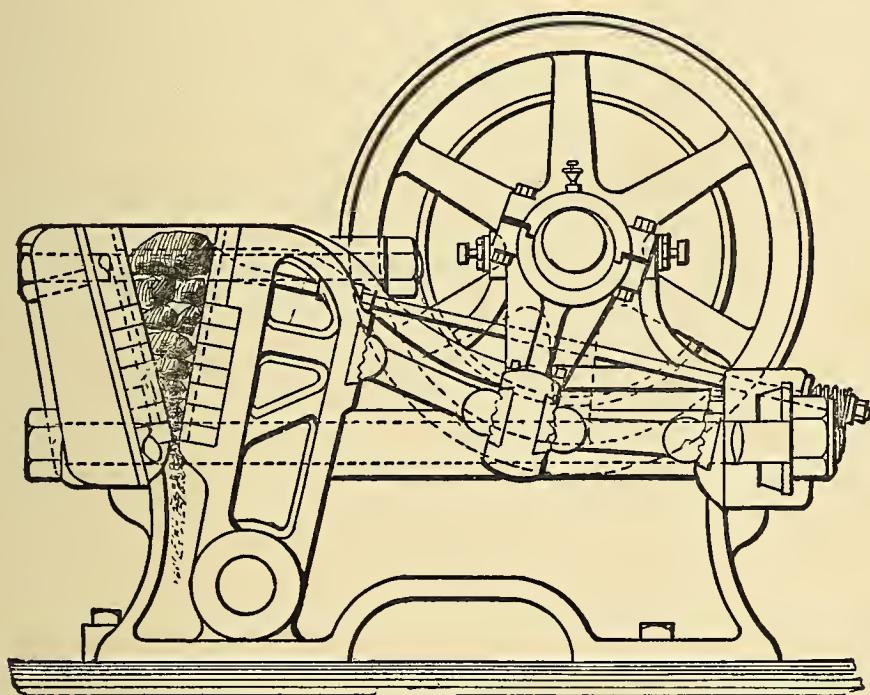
KROM'S IMPROVED SECTIONAL ROCK-BREAKER.
